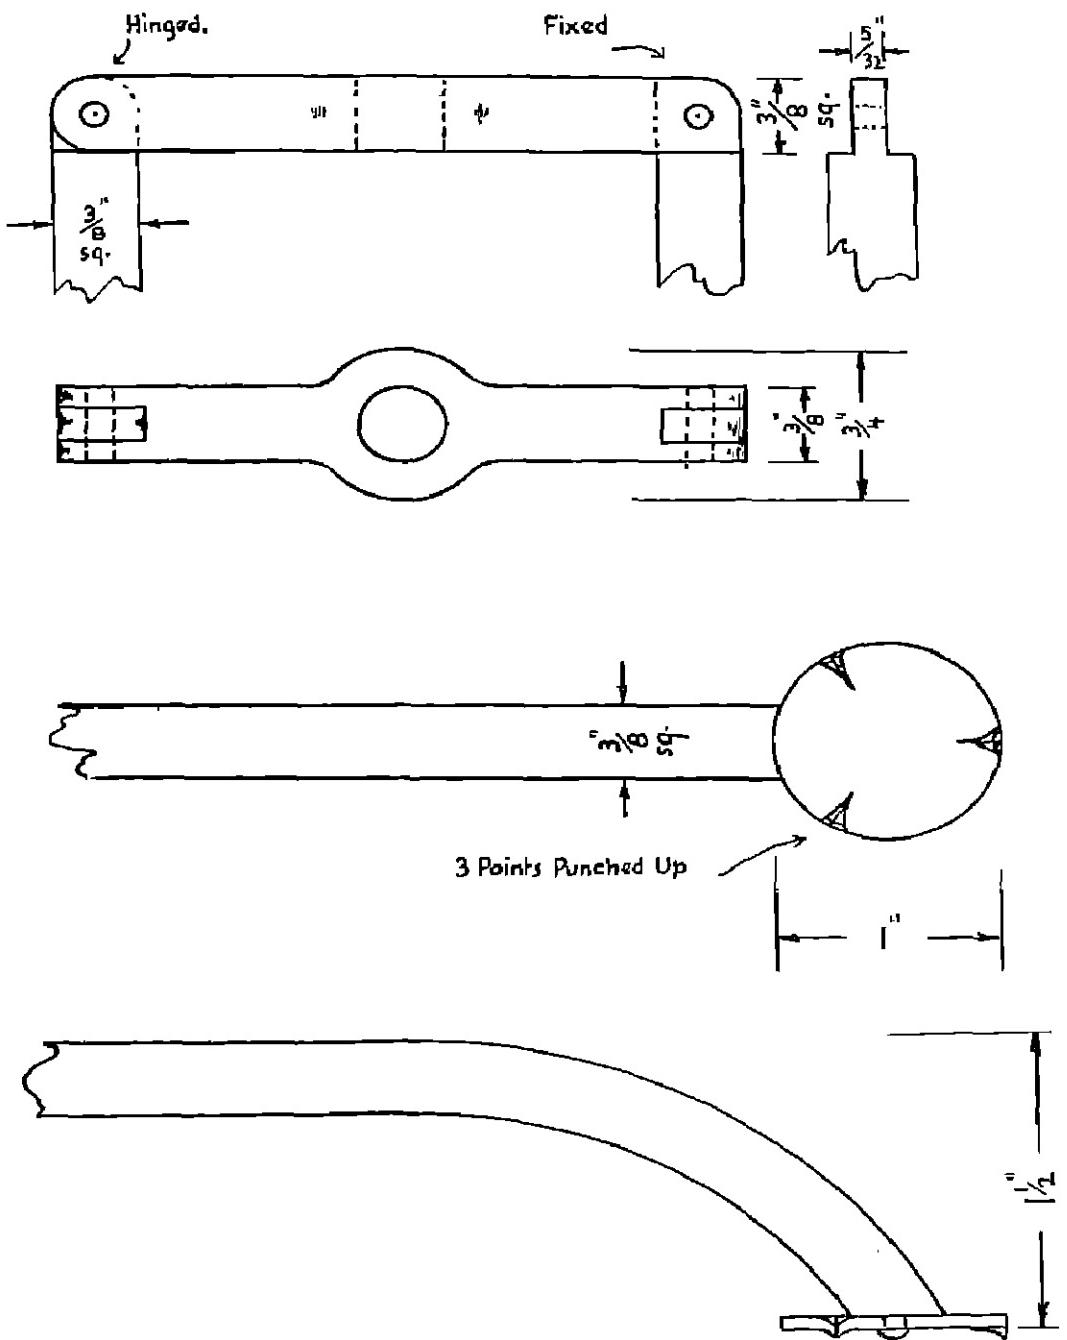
WORKING DRAWING OF TONGS FOR HEARTH SET
